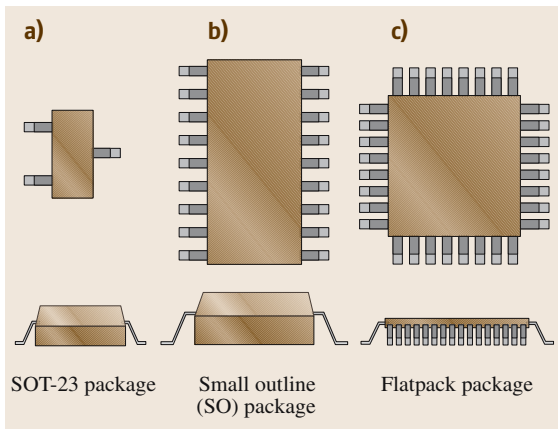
c Examples of surface-mounted packages (a) SOT-23 package (b) Small outline (SO) package (c) Flatpack package
